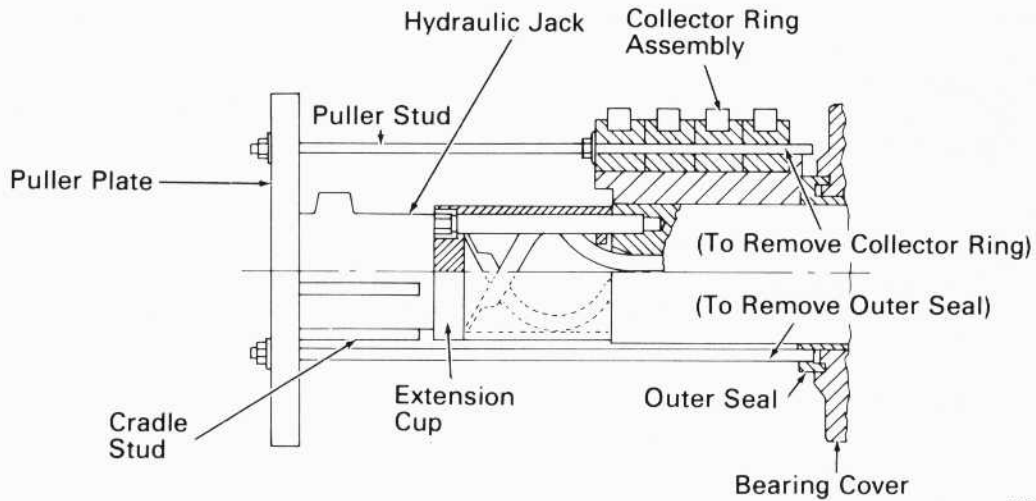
Collector Ring And Outer Bearing Seal Removal
